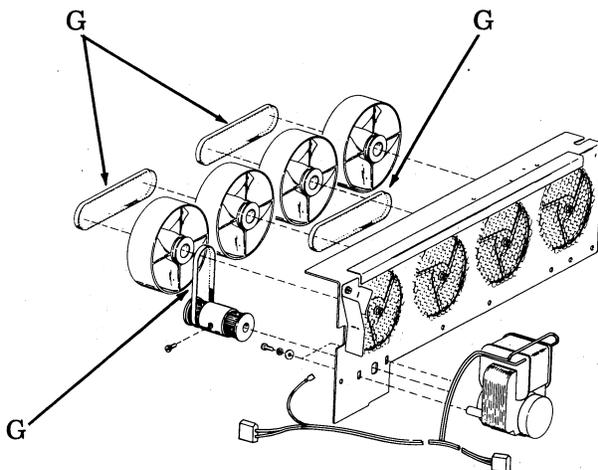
Lubrication of 401040 Belted-Type Fan Assembly
